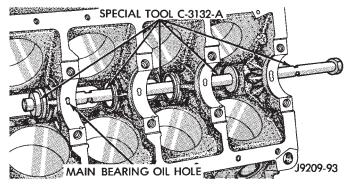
Camshaft Bearings Removal/Installation with Tool C-3132-A
